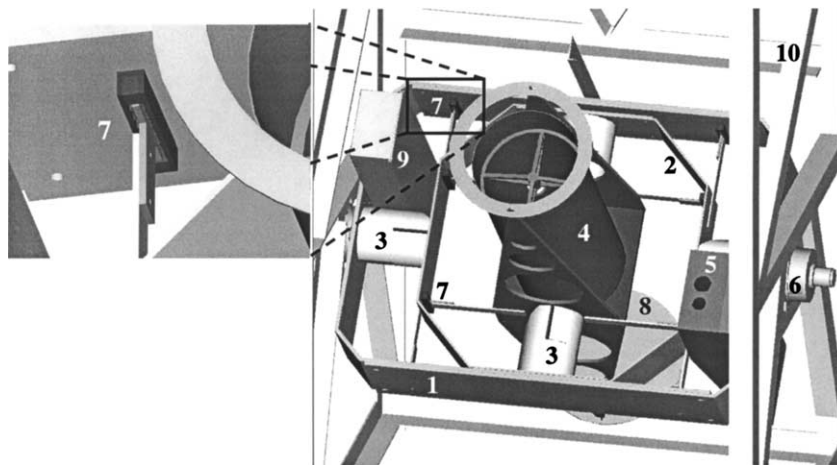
Schematic of the telescope mount and other sub systems: (1) Mount outer cage; (2) Mount inner cage; (3) Flex-pivots; (4) Telescope; (5) Guiding telescope; (6) Elevation motor; (7) Damping elements; (8) Ring weight for counter balance; (9) Pressurized vessel housing the DAC computer; (10) Gondola frame.
